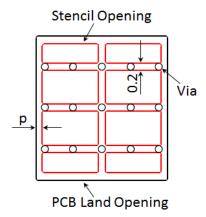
Stencil Openings Shall not Cover Via Areas If Possible (Dimensions are in mm)
